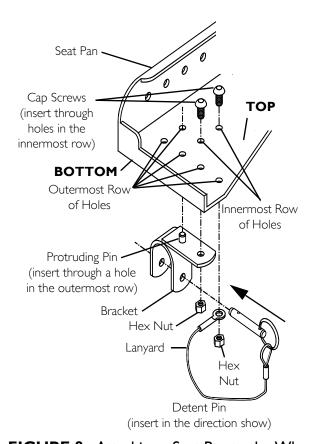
Attaching a Seat Pan to the Wheelchair Seat Rails
